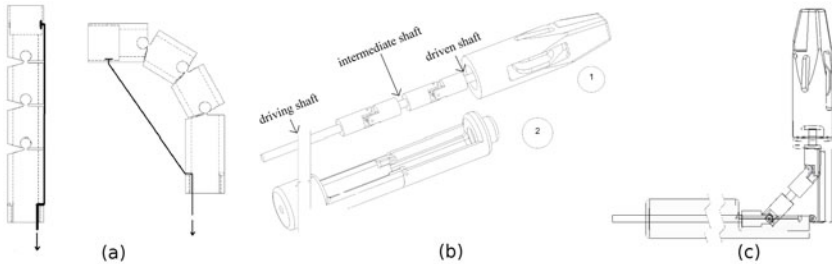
(a) Metallic bellow model’s wedged shell assembly with cable transmission for bending, (b) Universal joint and pincer assembly: (1) double universal joint and pincer assembly (2) shell unit, (c) Instrument in 90 degrees yaw position
